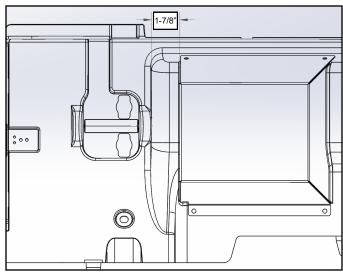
(Rework Rear Seat Cover, Drill)
